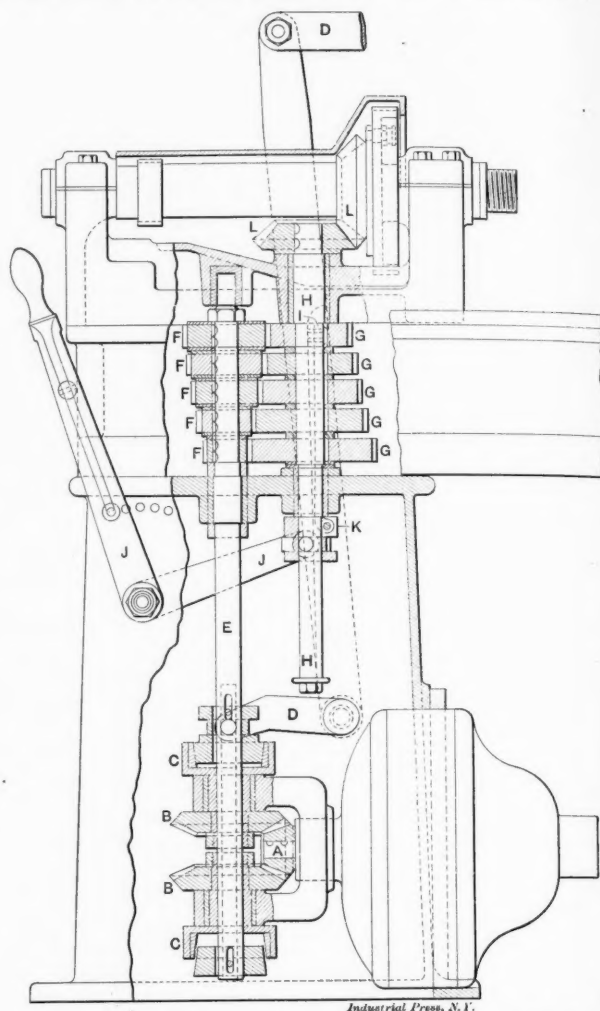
Details of Connections between Motor and Lathe Spindle.
